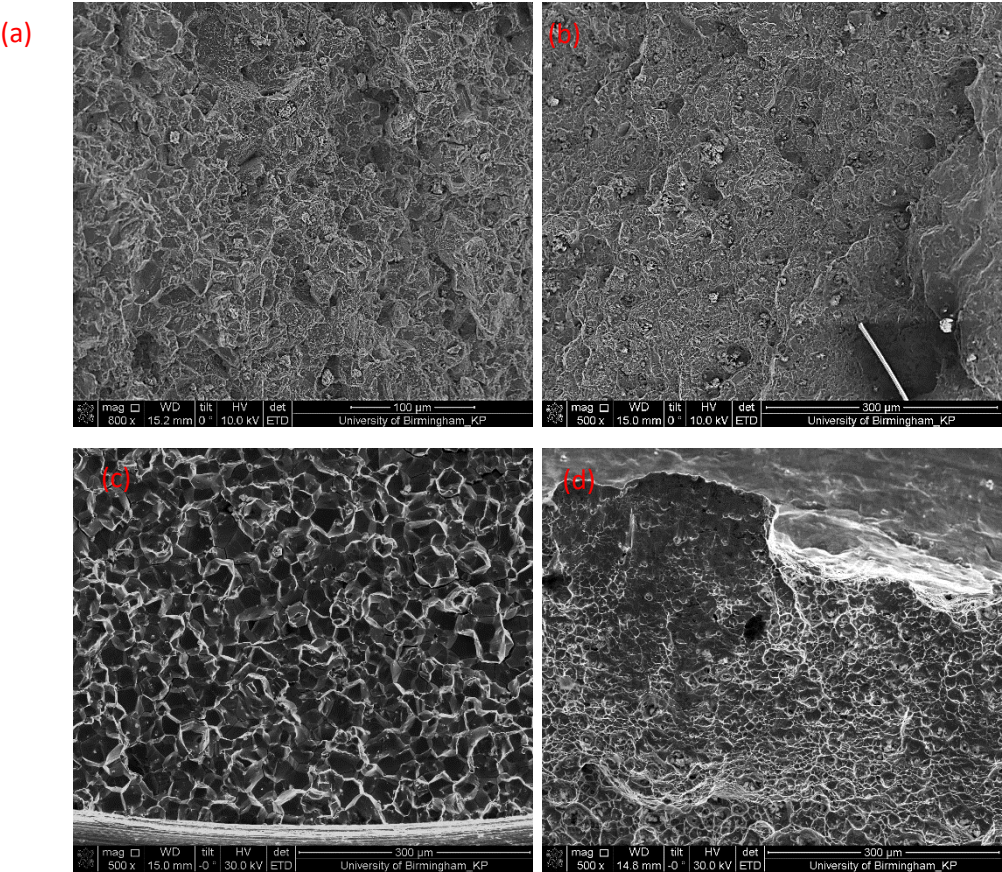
Fracture surfaces of (a) (b) HT2 notched sample, and (c) (d) HT3 notched sample
